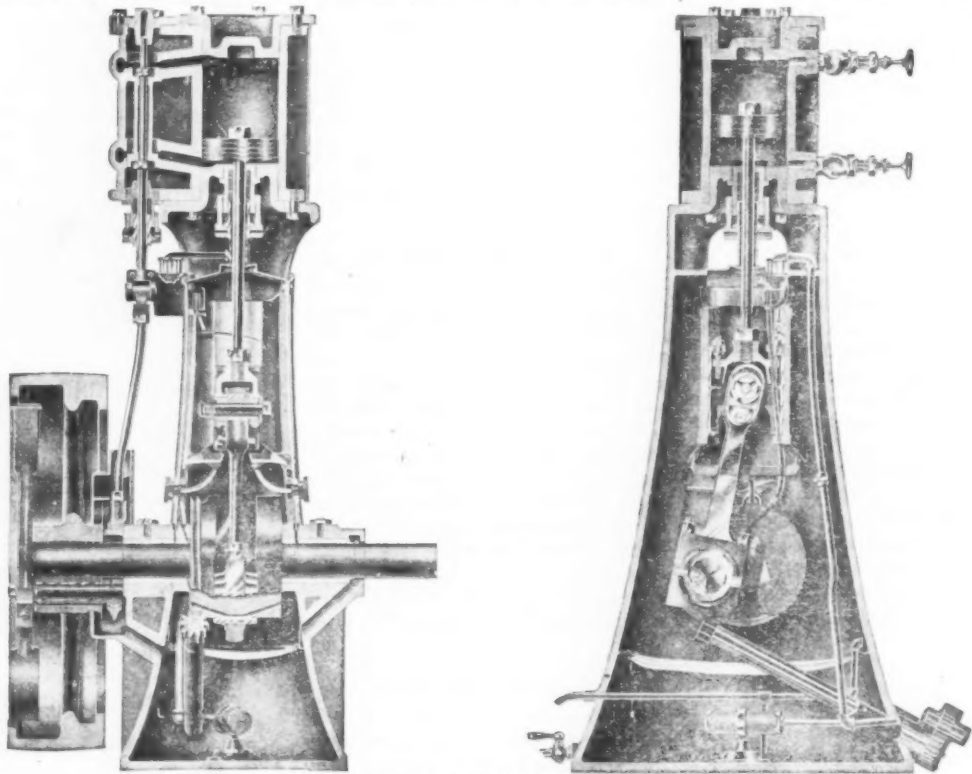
SMALL VERTICAL HIGH-SPEED ENGINE.—FIG. 2.
